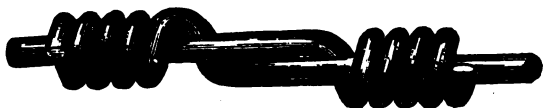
AMERICAN TELEGRAPH JOINT.
